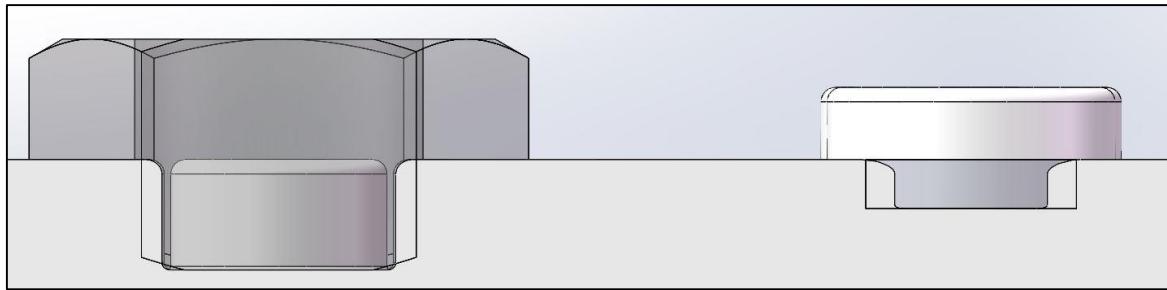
Interference occurs when steering gear washer (left) and steering gear nut (right) is inserted into the right hand suspension hardware fixture [63].
